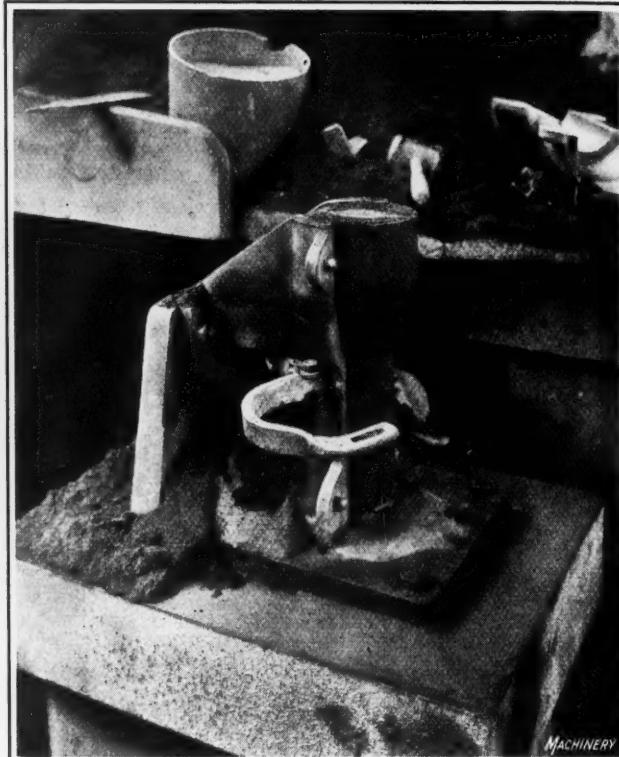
Jolting Machine shown in Fig. 2, with Front Cover of Core-box removed
